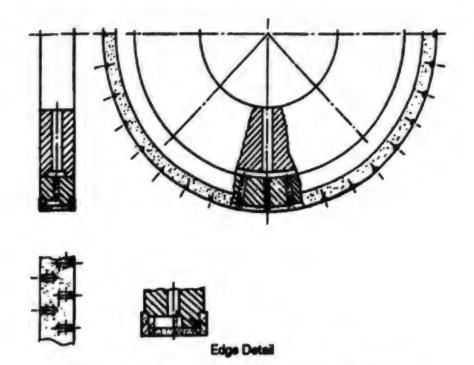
New Both-Edge Through-Liquid CBN Wheel
